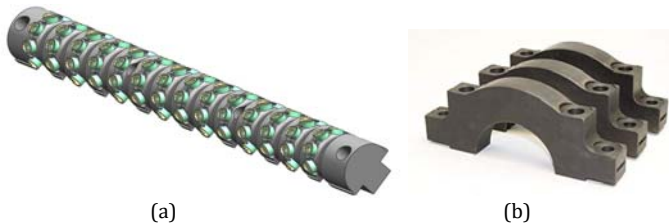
Indexable carbide insert broach (a) for internal broaching of bearing cap (b) automotive component [84].
